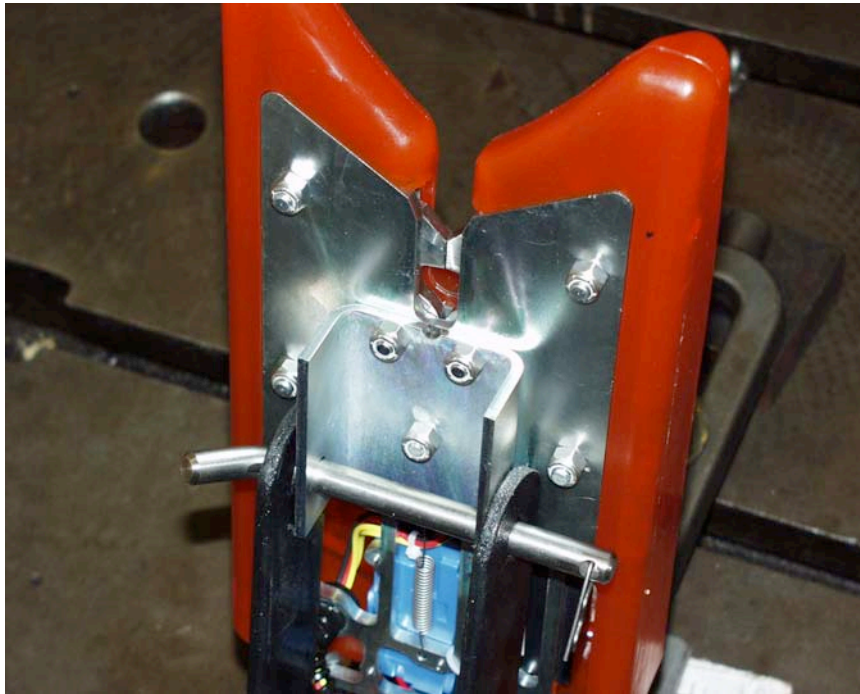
Overall view of denting of the SNAPPER mounting plate from contact with the bow eye.
